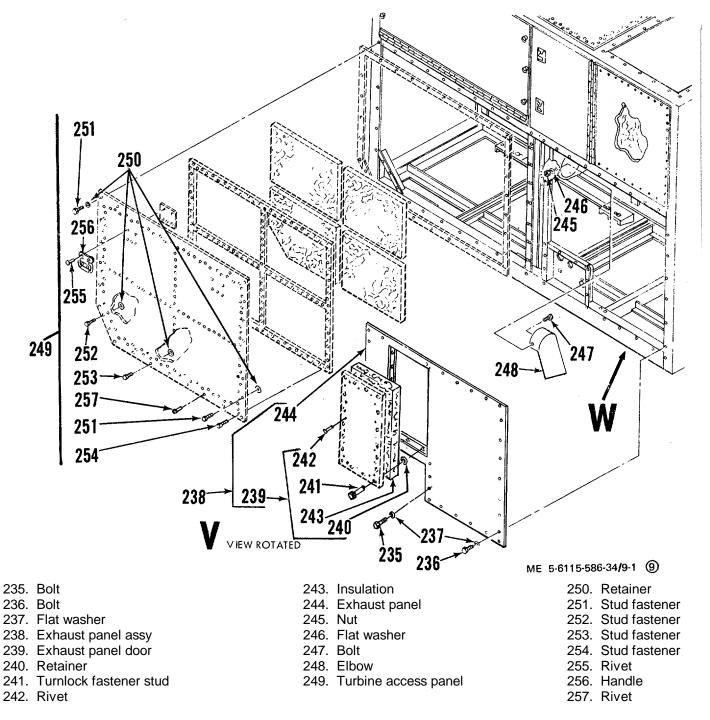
Enclosure assembly, exploded view. (sheet 9 of 10)
